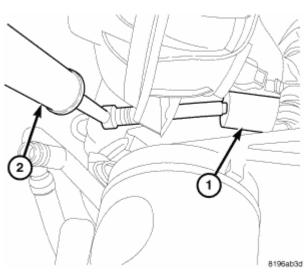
OIL PRESSURE SENSOR Courtesy of CHRYSLER LLC
